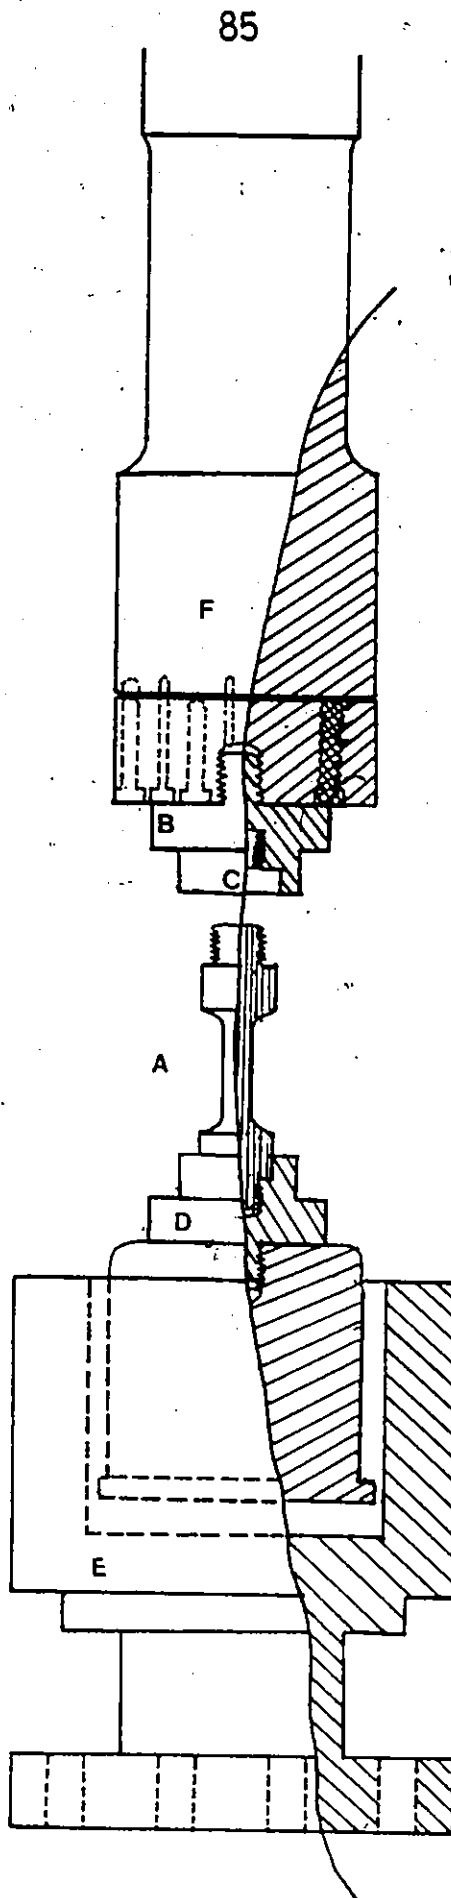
Load-alignment fixture used for conducting Bauschinger (push-pull) tests.
